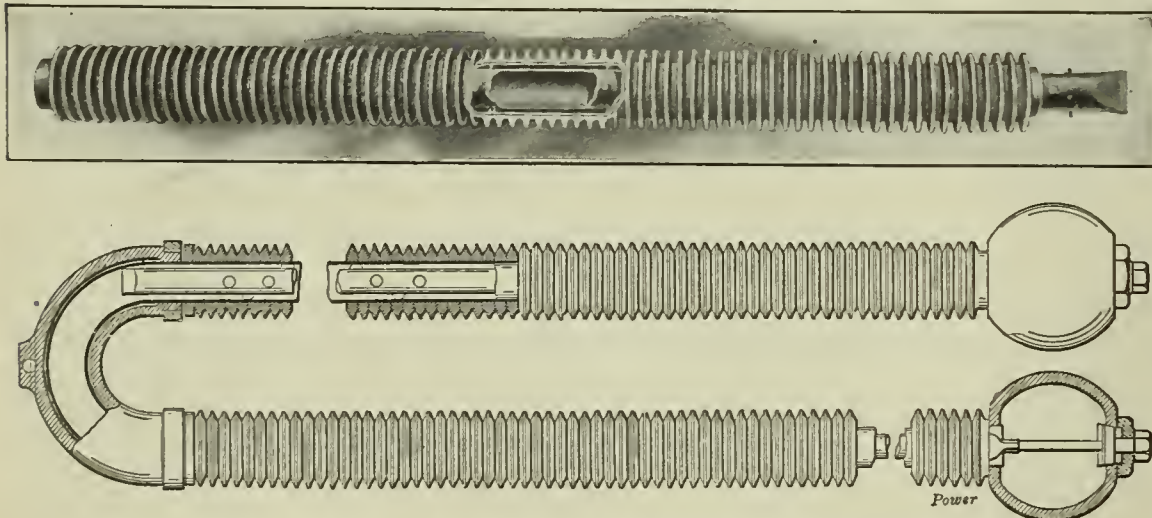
SECTIONAL VIEW OF FOSTER TUBE AND HEADERS
